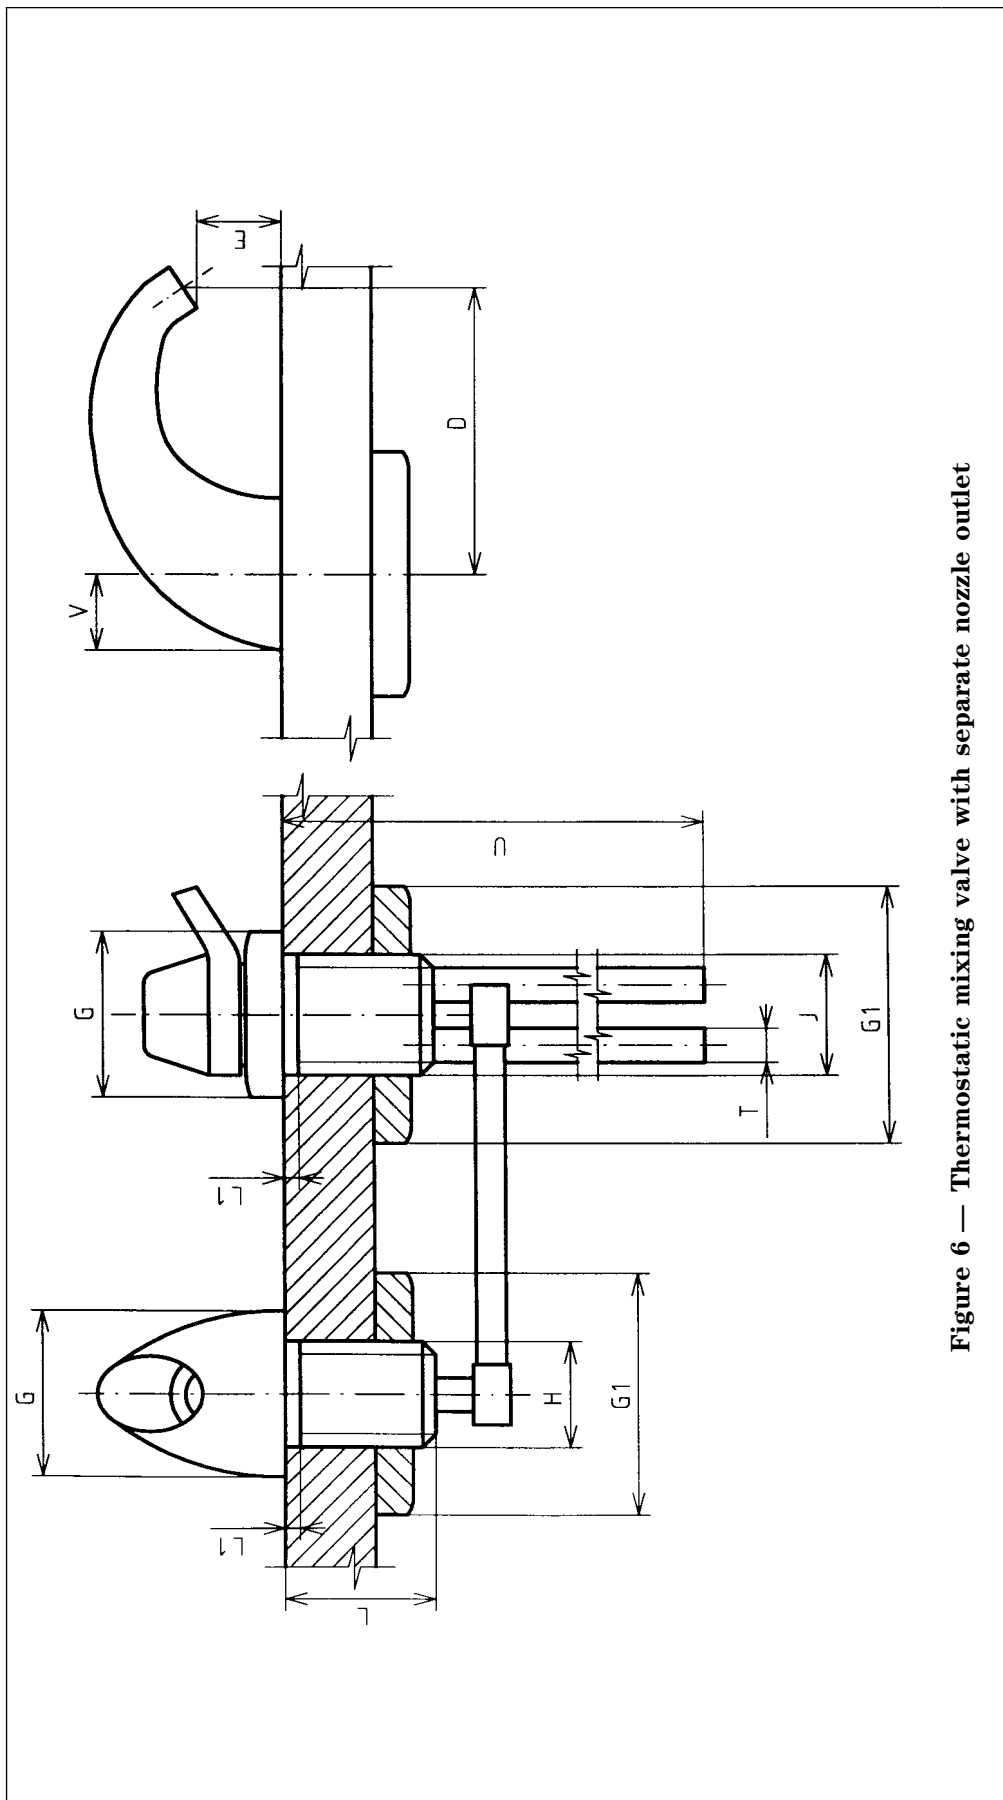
Thermostatic mixing valve with separate nozzle outlet
